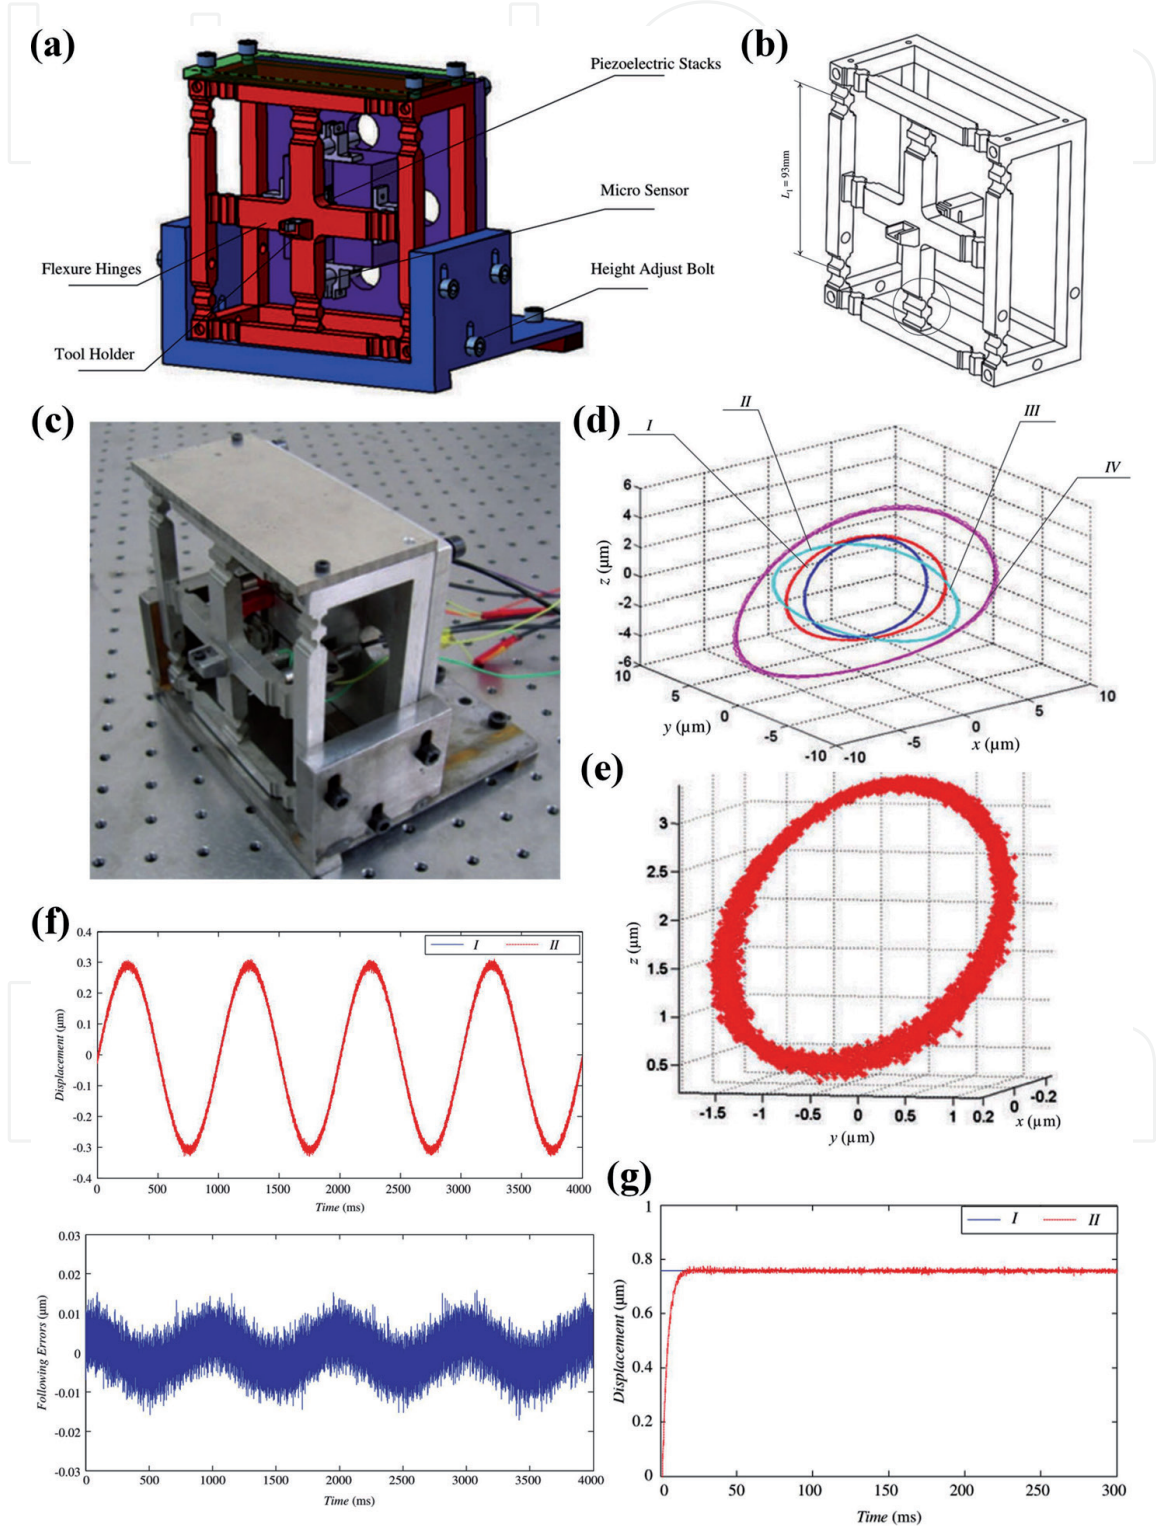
Illustration of 3D model, prototype and testing results. (a) 3D model of the developed EVC vibrator. (b) Mechanical structure of compliant mechanism. (c) Fabricated prototype. (d) Simulated tool locus. (e) Actual tool locus. (f) Tracking performance. (g) Step response [16].
